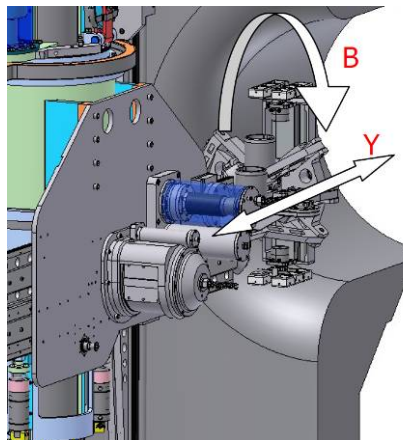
Nozzle Welds and Inner Radii Inspection Module
